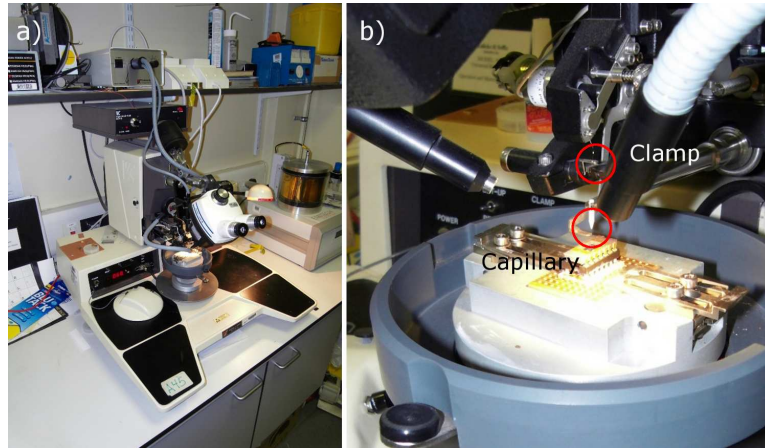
Photographs of the wire-bond machine used for this work, a) full image, b) close up of bonding armature (highlighted are the capillary and clamp).
